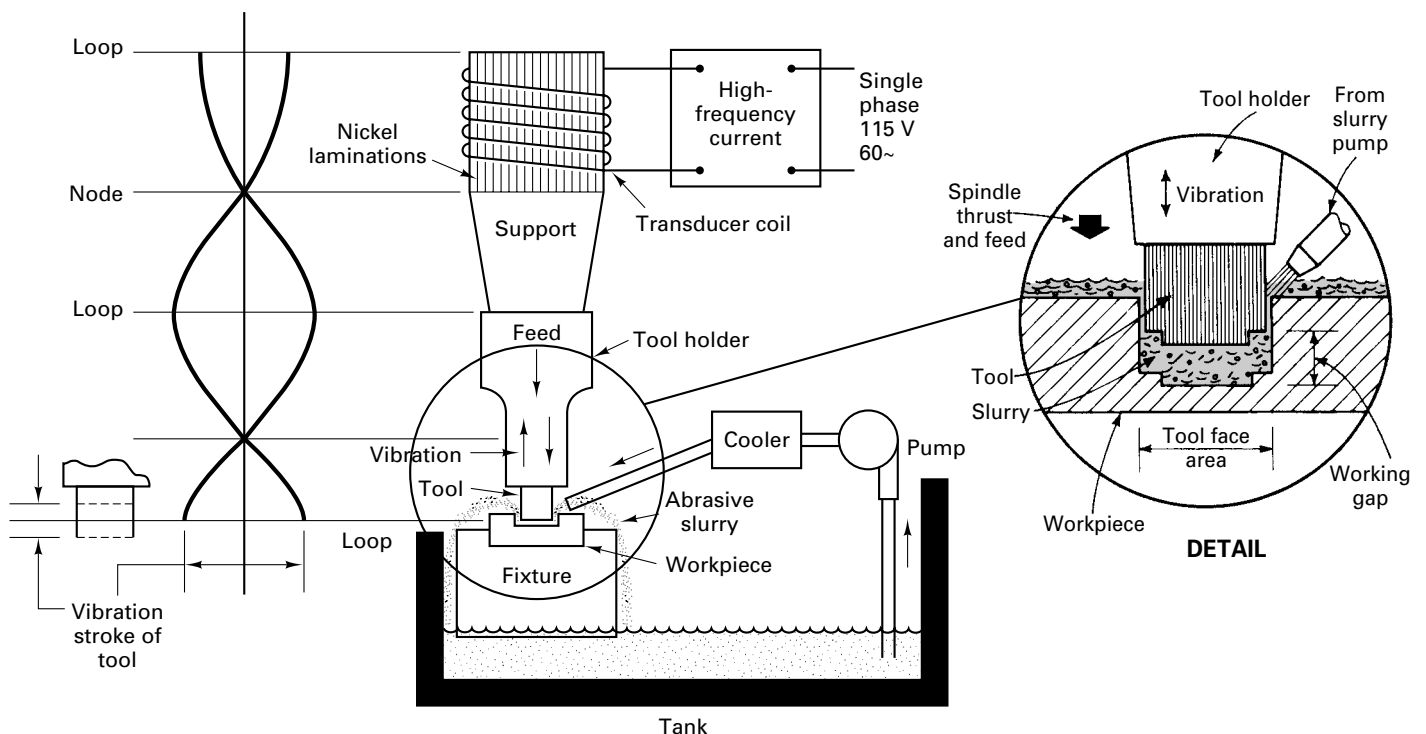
Sinking a hole in a workpiece with an ultrasonically vibrating tool driving an abrasive slurry.
